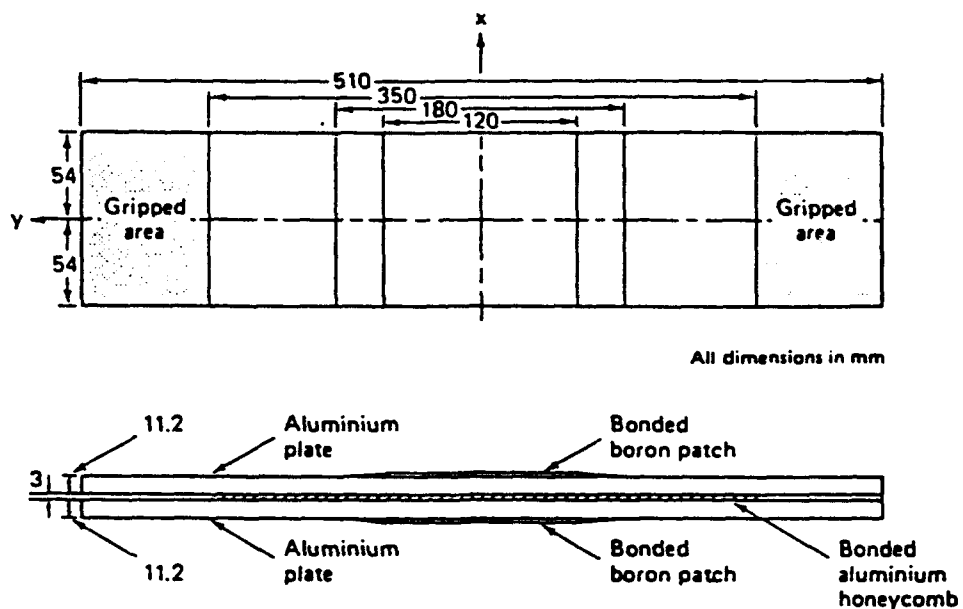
TEST GEOMETRY FOR THE SURFACE FLAW SPECIMEN
